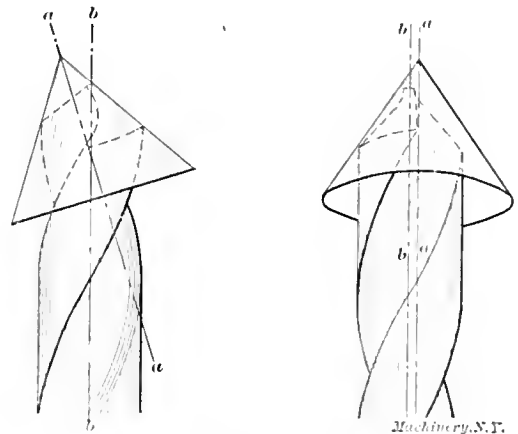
Form given to the Lip of a Drill by the Sellers Drill-grinding Machine
